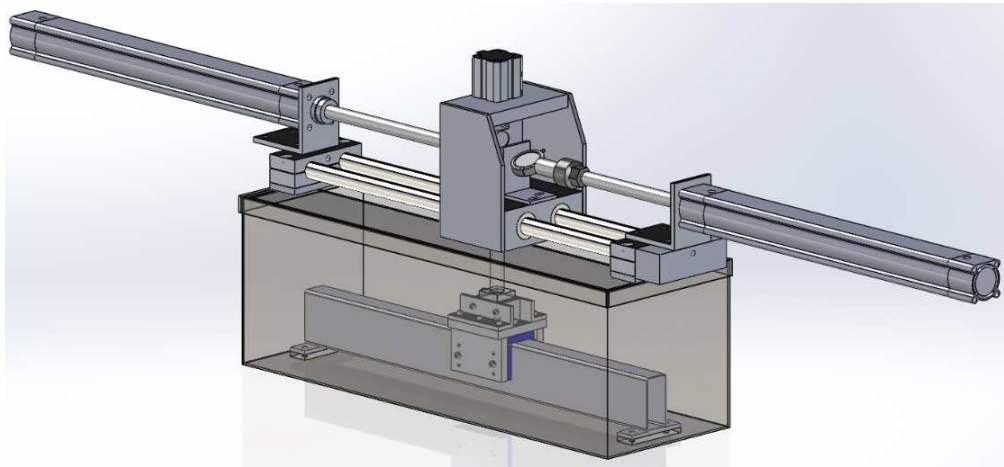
The alteration of the bearing test rig to include a second compressed air actuator in order to improve bearing testing and machine performance
